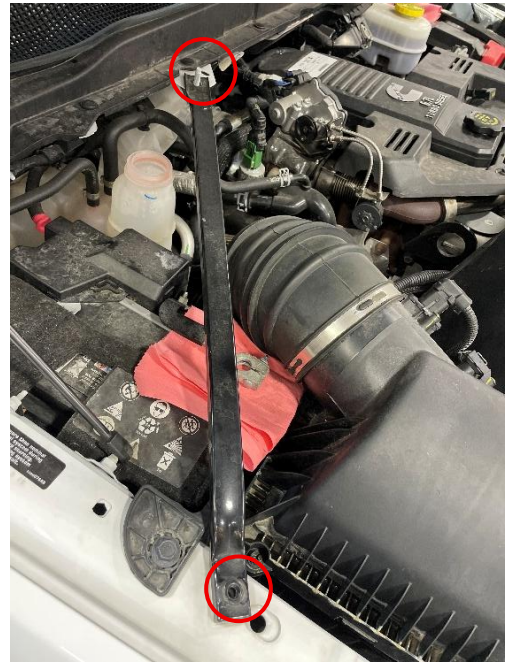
Fender brace on passenger side of vehicle, fastener locations circled.
